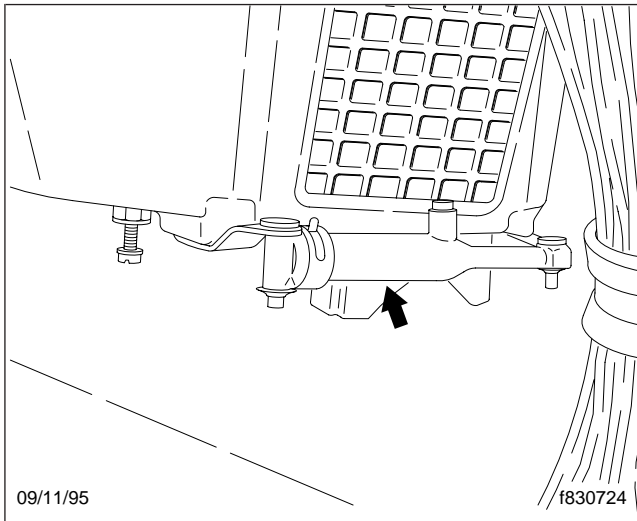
, Inlet Air Cylinder (located under the blower motor)
